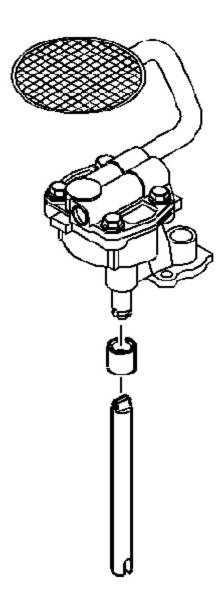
View Of Oil Pump Driveshaft & Oil Pump Driveshaft Retainer Courtesy of GENERAL MOTORS CORP.
